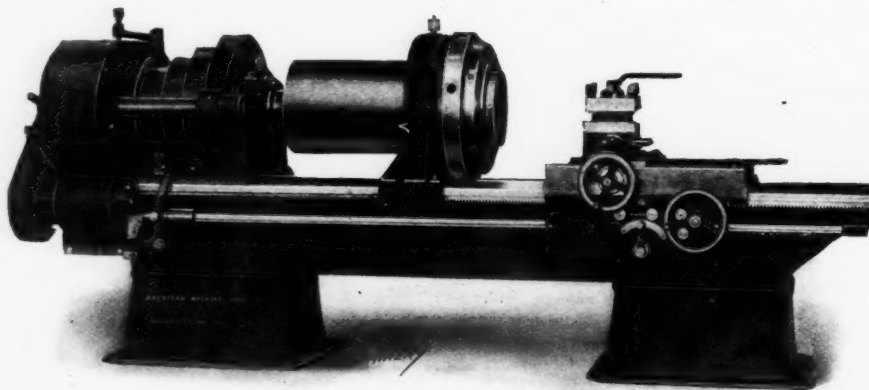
American Machine Tool Co.'s 24-inch Shell Lathe equipped with Steadyrest and Chuck
